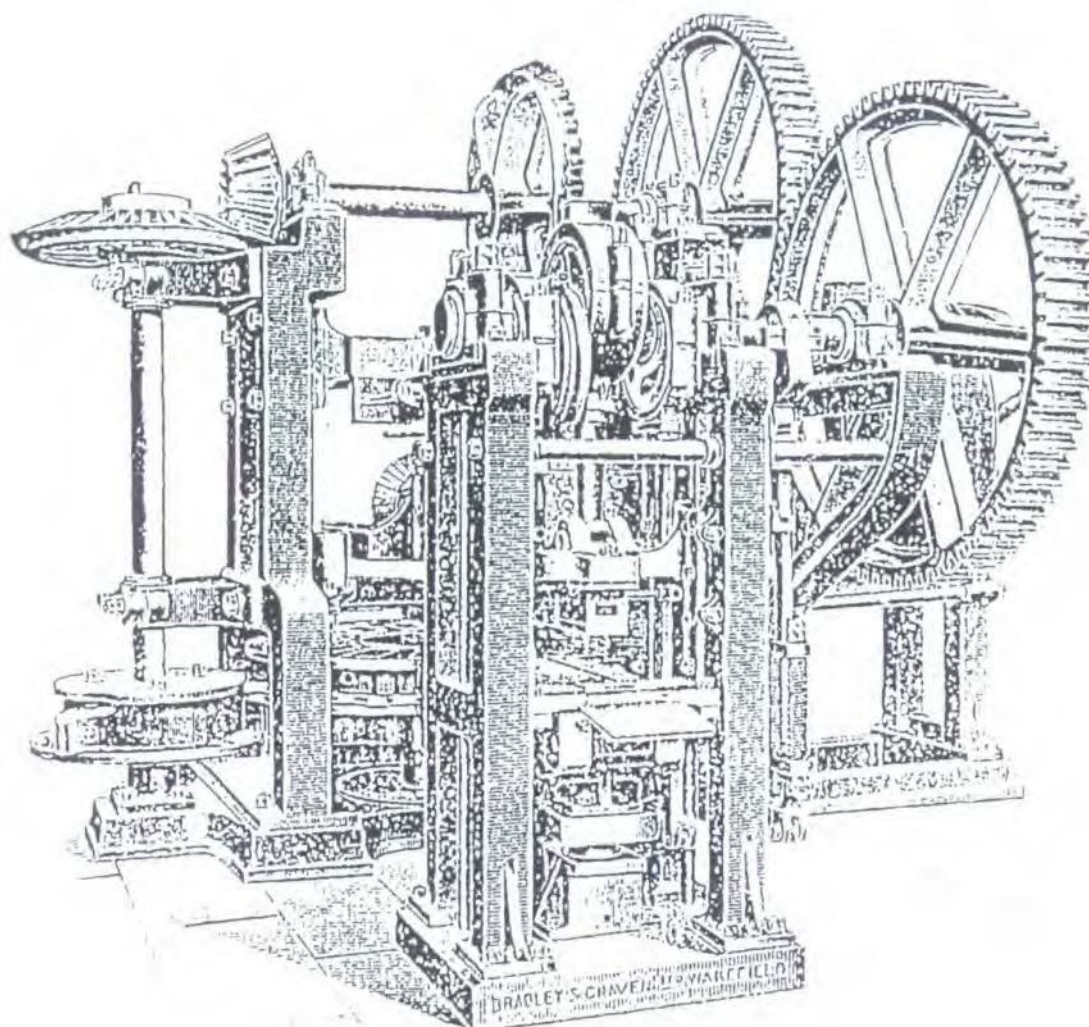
PLATE XIV: A Bradley and Craven stiff plastic machine with mixer, vertical pugmill, a rotating mold table, and press. This machine was patented in 1859. (Hammond M. 1981, P.18)
